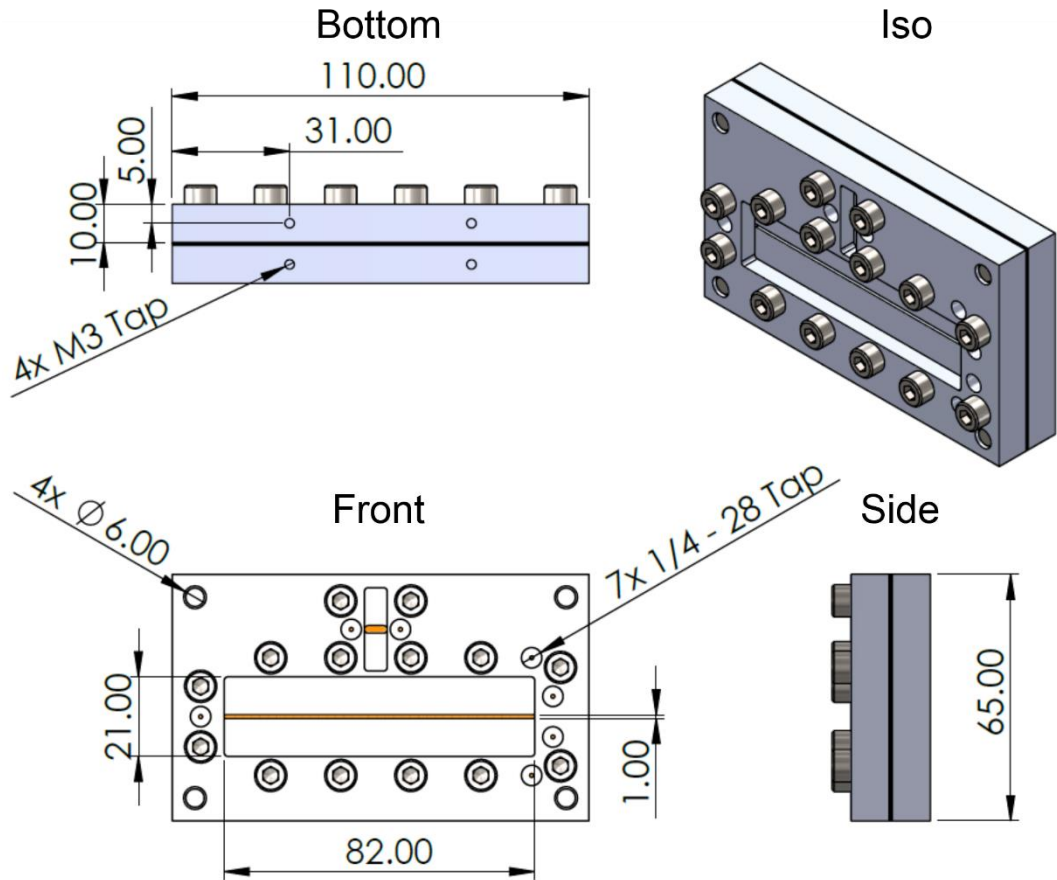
CAD drawing of assembled insert-based device made using SolidWorks. All dimensions in mm
